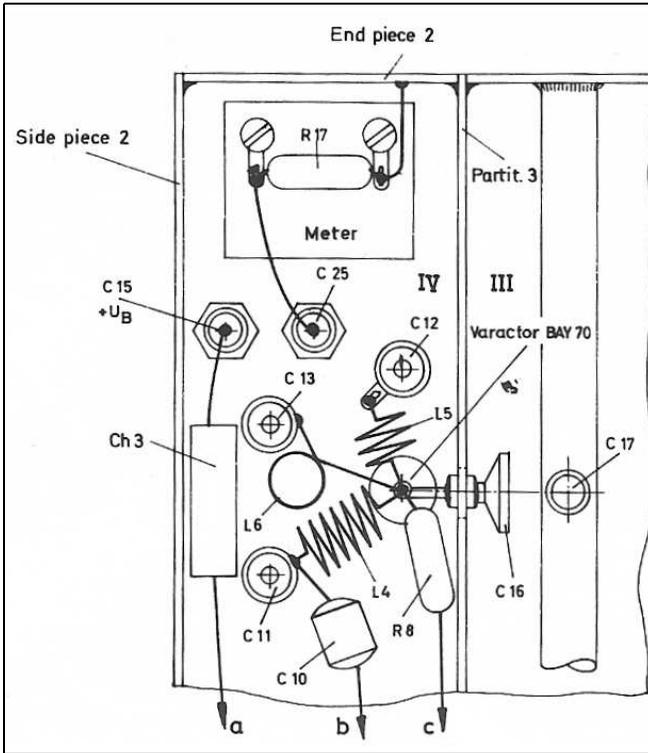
Mechanical assembly of the varactor multiplier in chamber IV.
